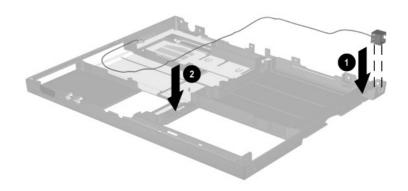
Routing the Modem Cable in the Base Enclosure
